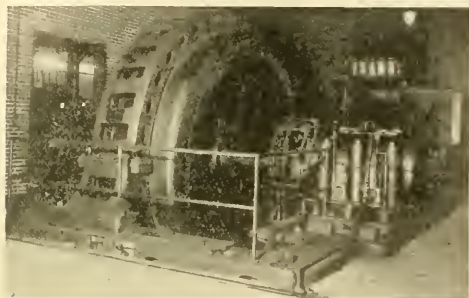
5000 HP INDUCTION MOTOR DRIVING A 132 INCH THREE HIGH PLATE MILL
